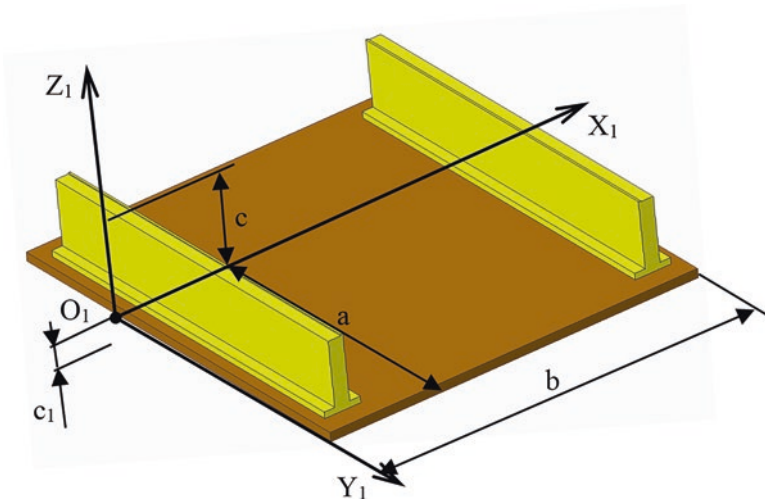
Detailed calculation model of the bed of the milling machine [3]
